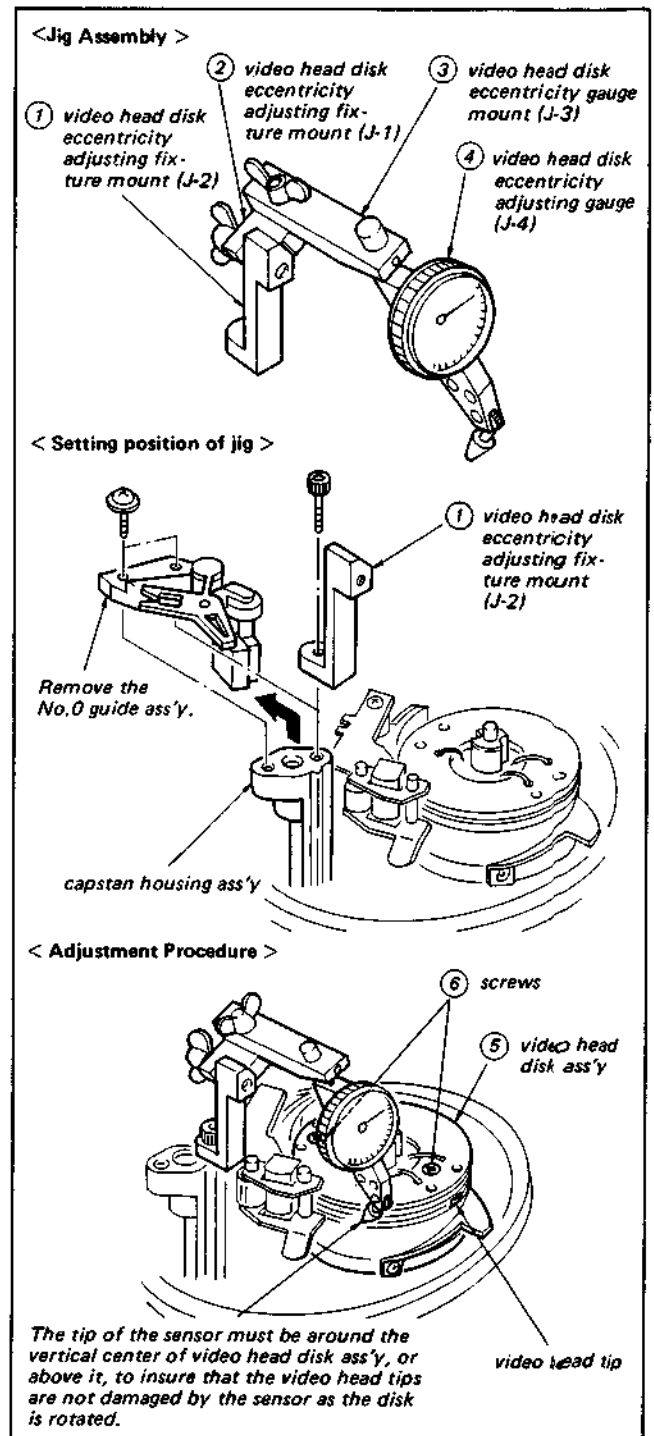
Eccentricity adjustment of the video head disk assembly
